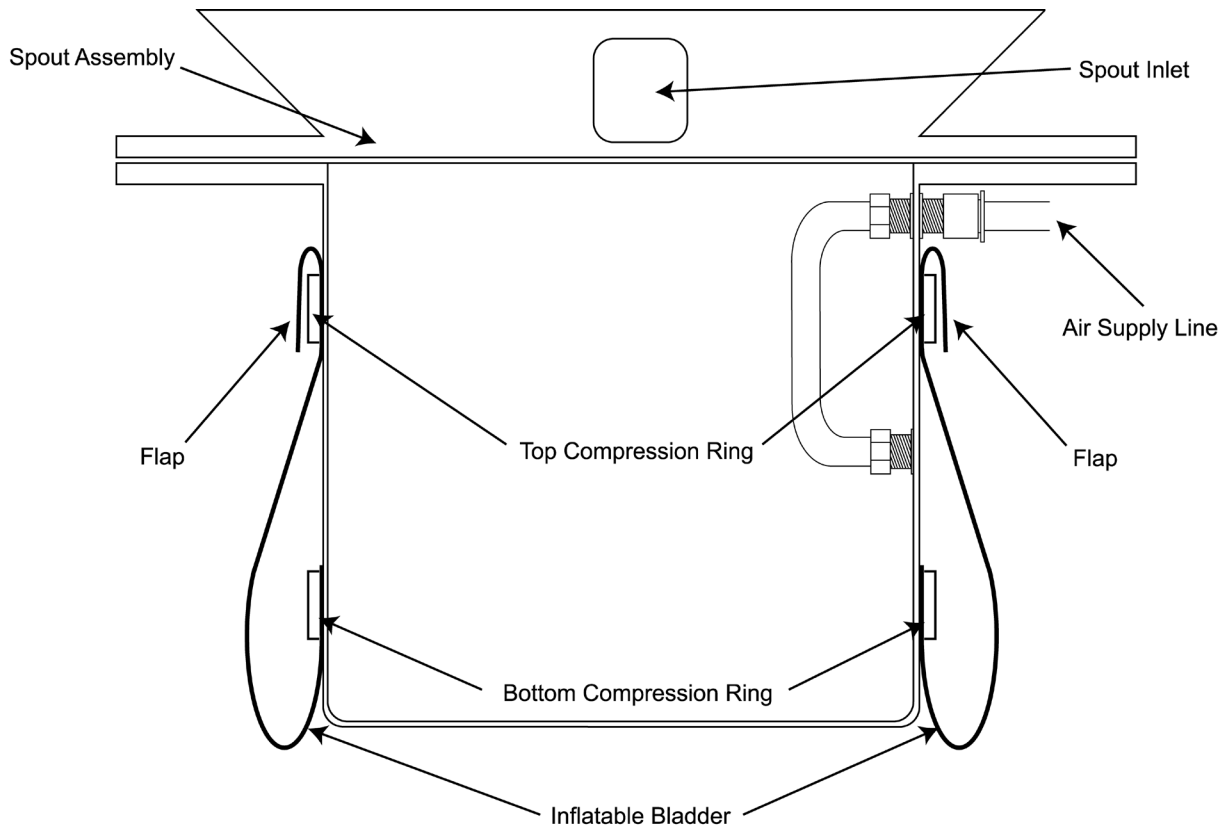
Sectional View of Spout and Inflatable Bladder
